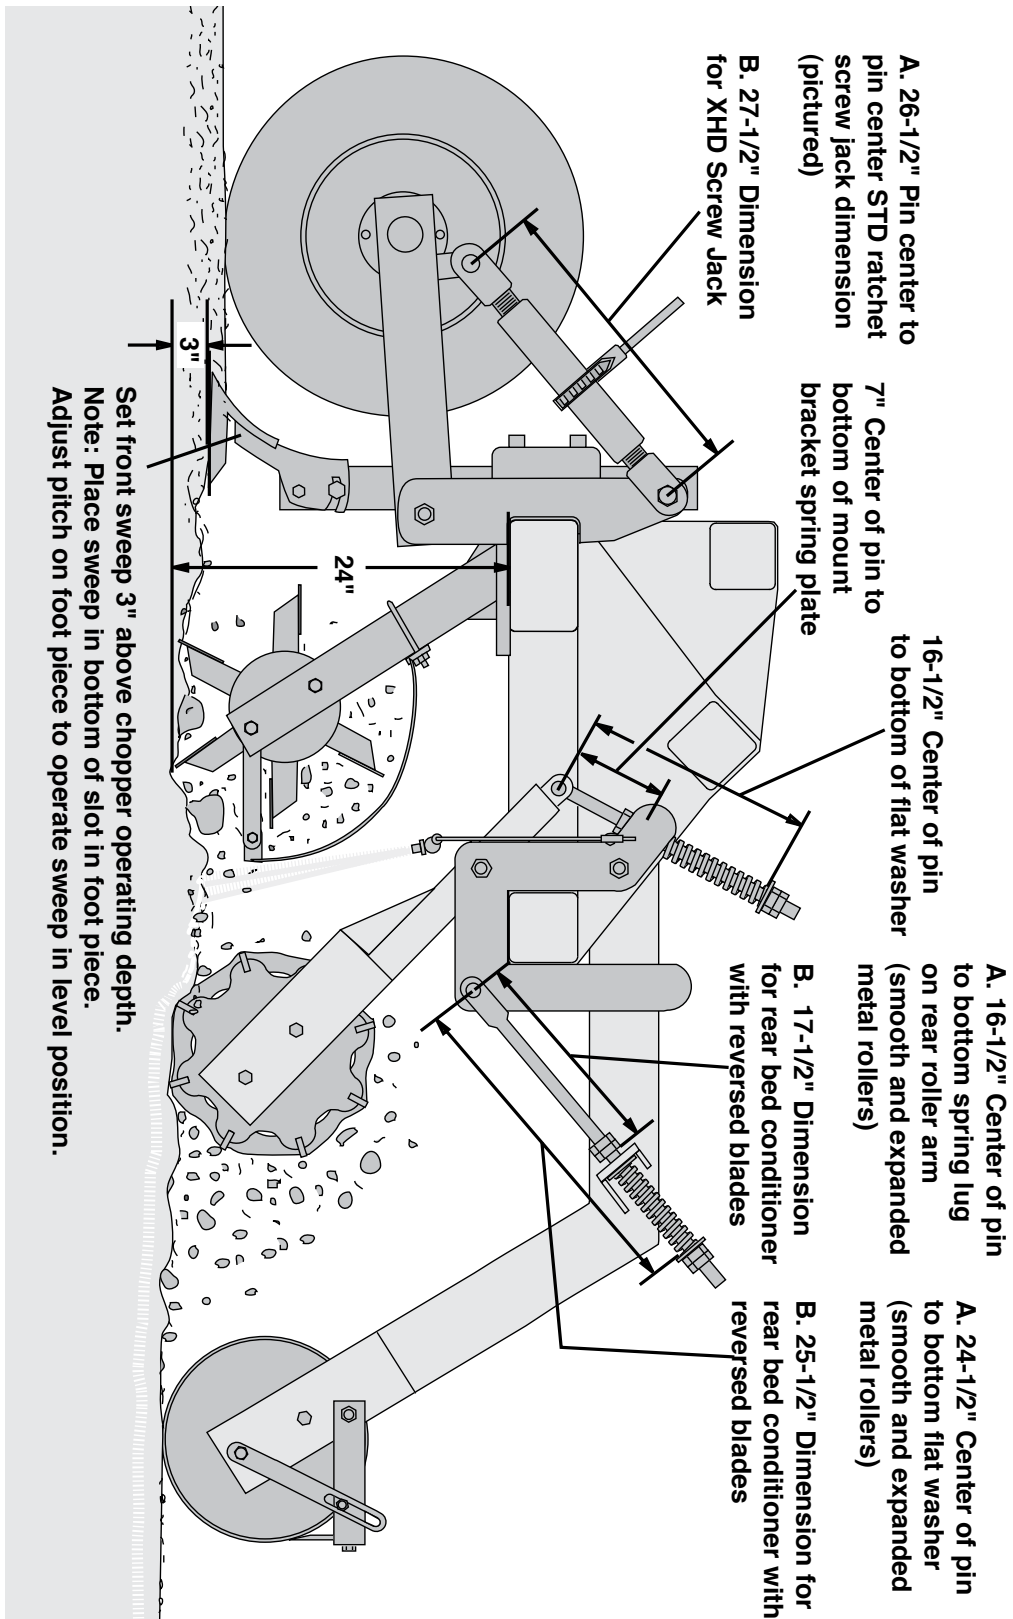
Figure C: Set-Up Diagram (Side View) with Typical Component Adjustment Dimensions
